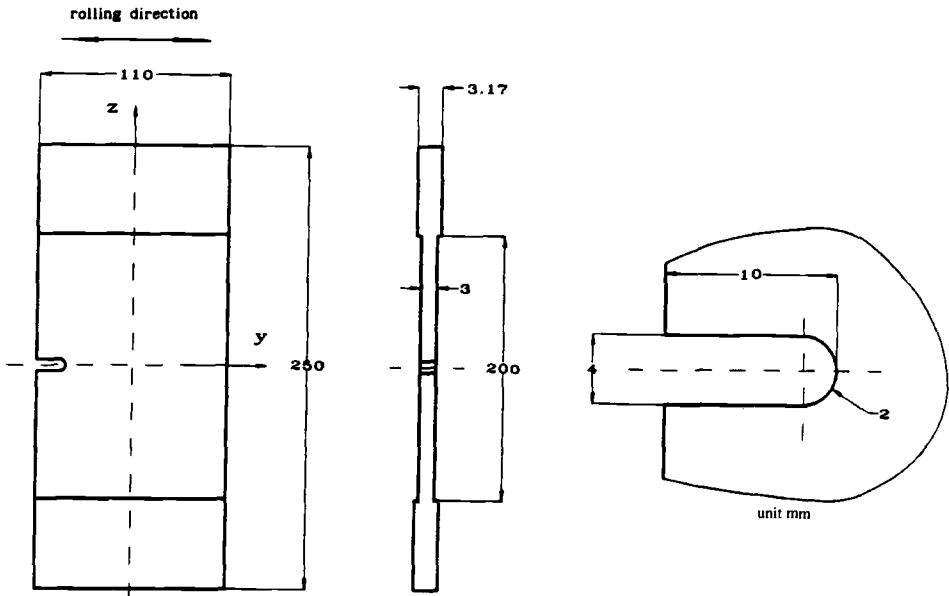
Notched specimen for fatigue crack initiation.
